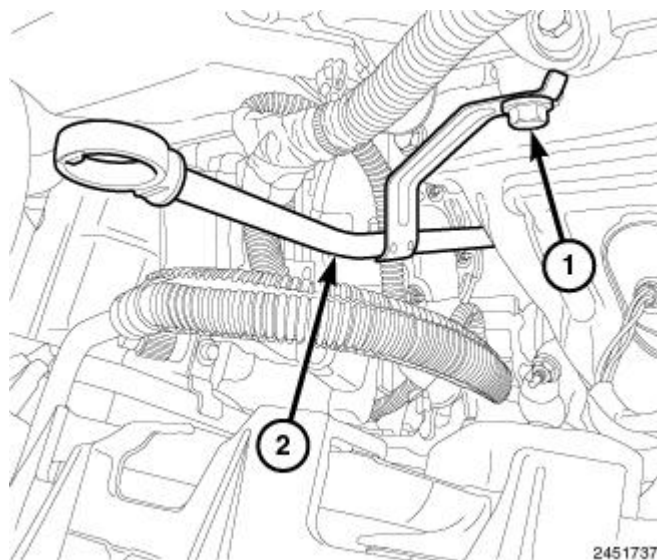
Identifying Oil Dipstick Tube & Bolt
